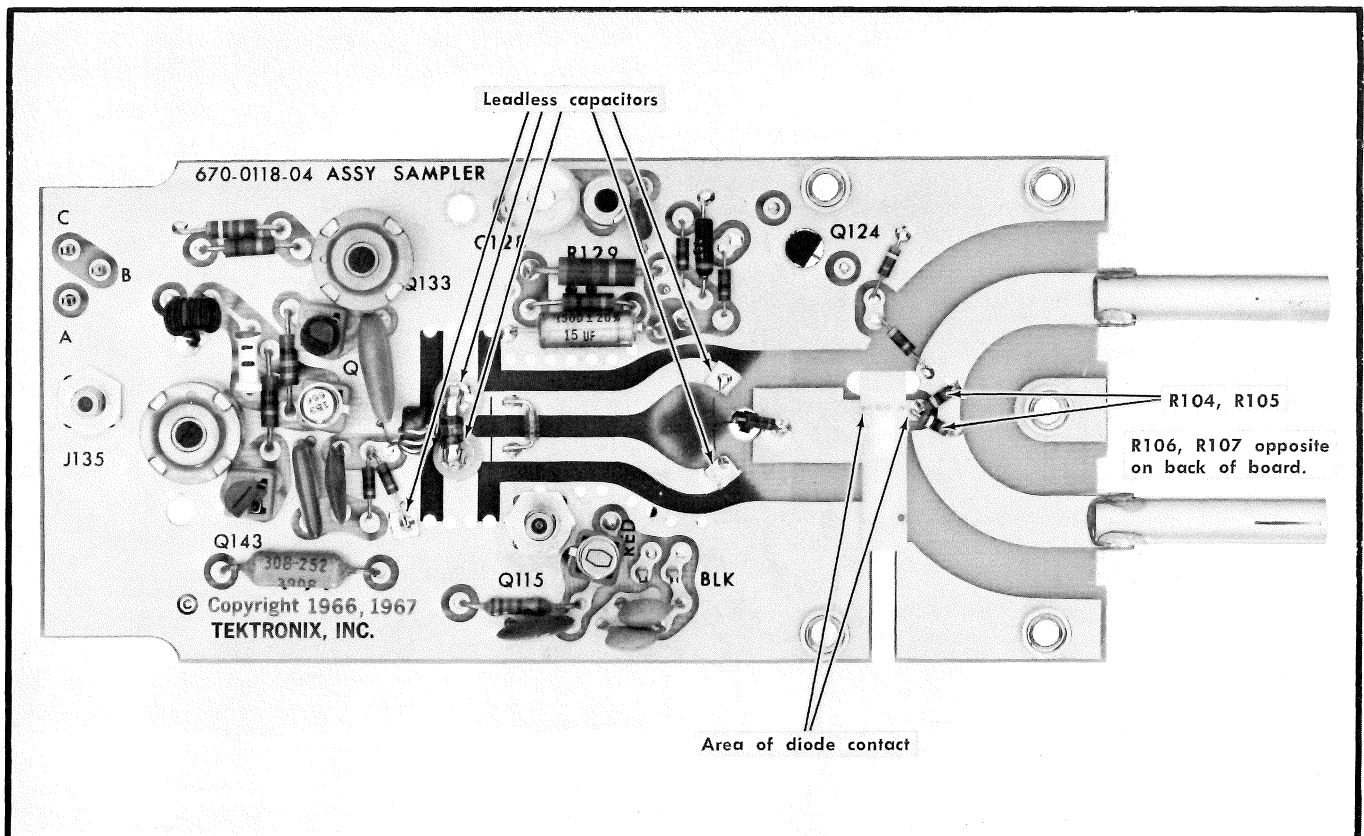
R104, R105, R106, R107 soldering and sampling diode clips.
